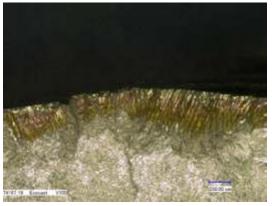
Fracture surface of one of the surface cracks at Object 1.
